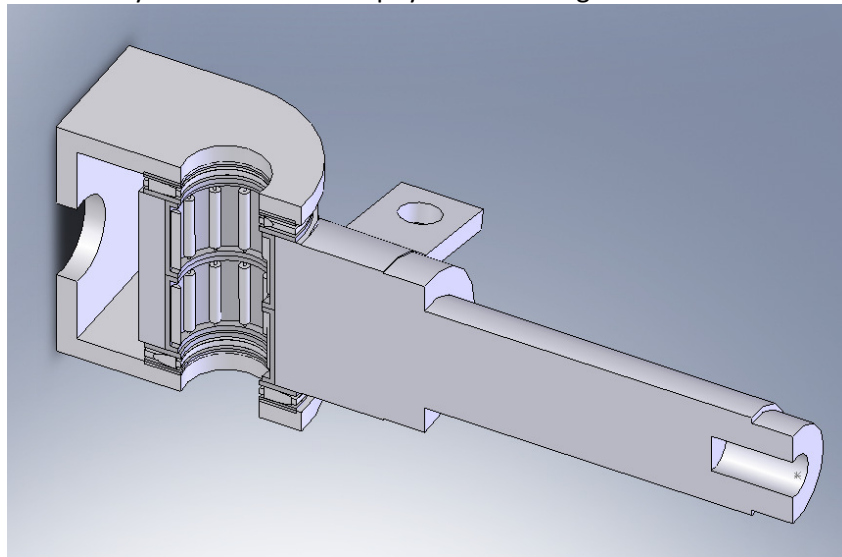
Cross section of the front wheel axle and supporting knuckle.
